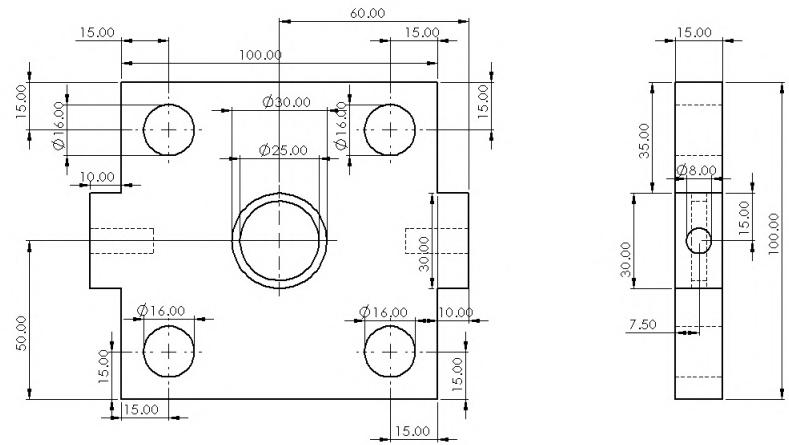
2D Drawing of the spring middle plate (All dimensions are in mm)
